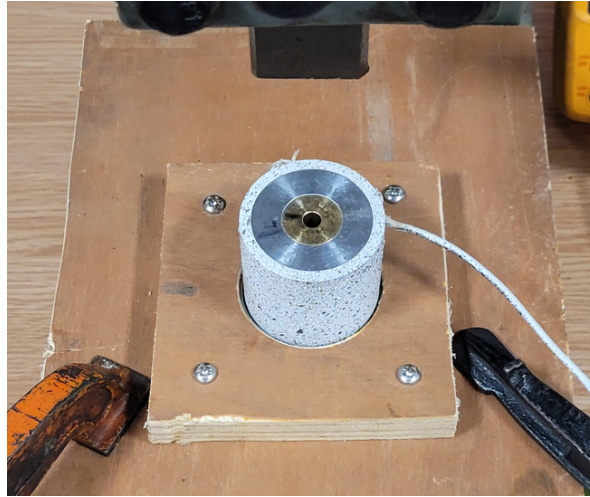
Complete three-cylinder shrink-fit assembly.
